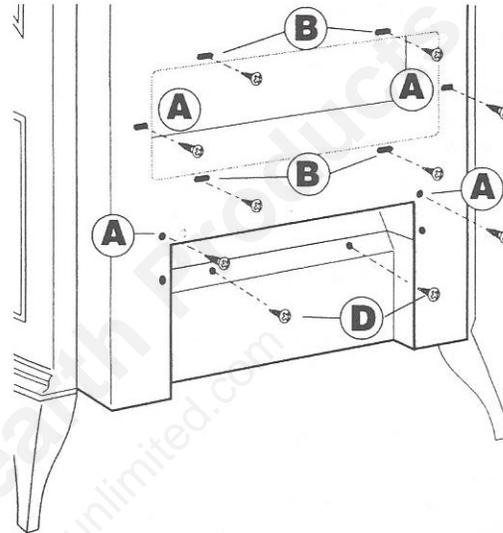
Fasten the rear shroud to the firebox heat exchanger panels.
